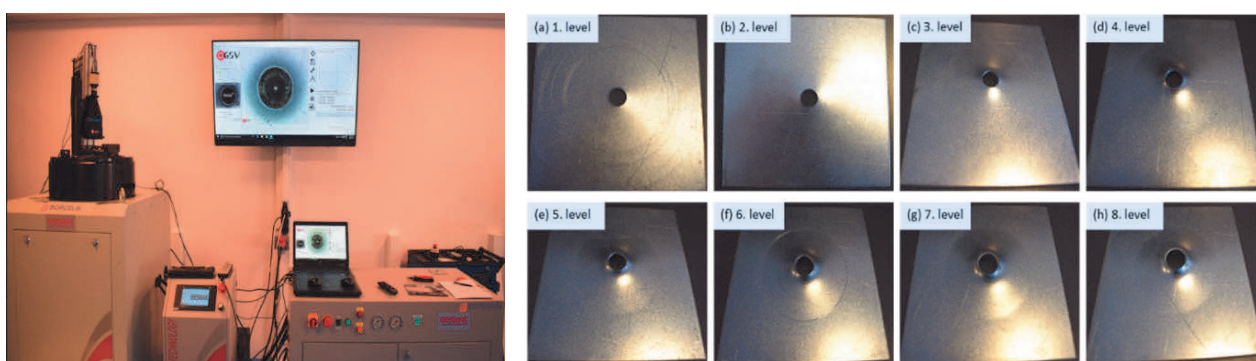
(a) Equipment for hole expansion test, (b) Photographs of tested samples
